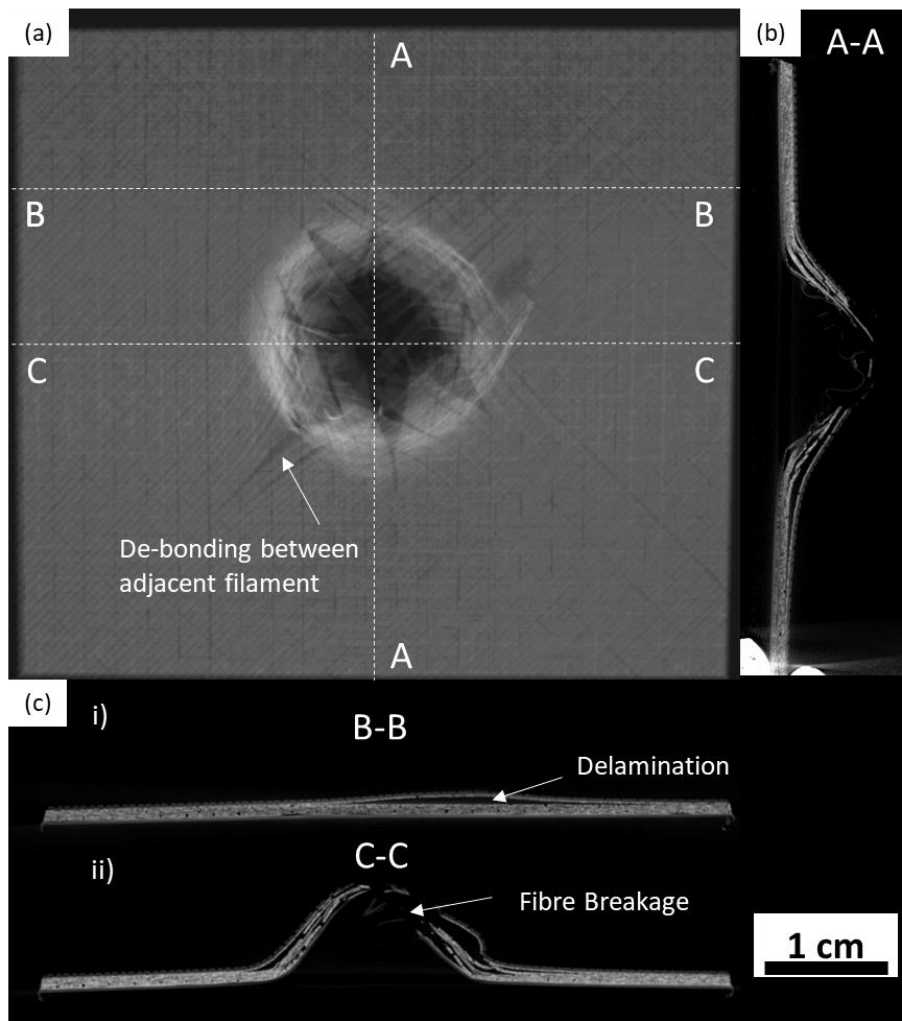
(a) Top view of the μ CT-scan image of the fractured area of glass fiber specimen (b) CT-scan image of the side view of the fractured area of carbon fiber specimen (c) fiber specimen CT-scan image of the cross section view of the fractured area of carbon fiber specimen
